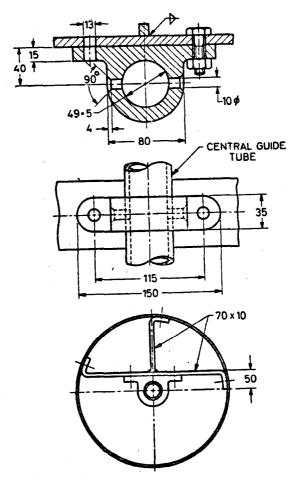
Details of Central Guide Tube and Pivot Bearing
